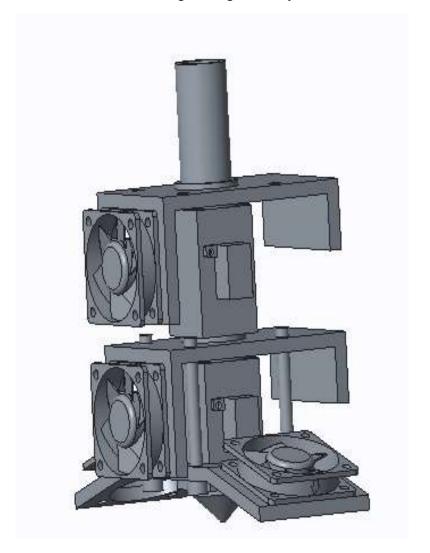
Model with the heaters, the fixing plates and the layer fans support assembled to the cylinder.
